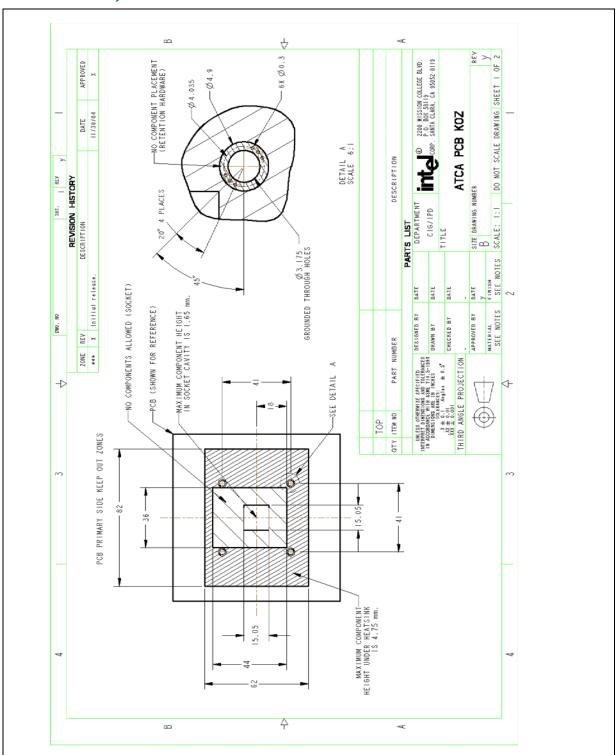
AdvancedTCA* Reference Heatsink PCB Keep Out Zone Requirements (Sheet 1 of 2)
